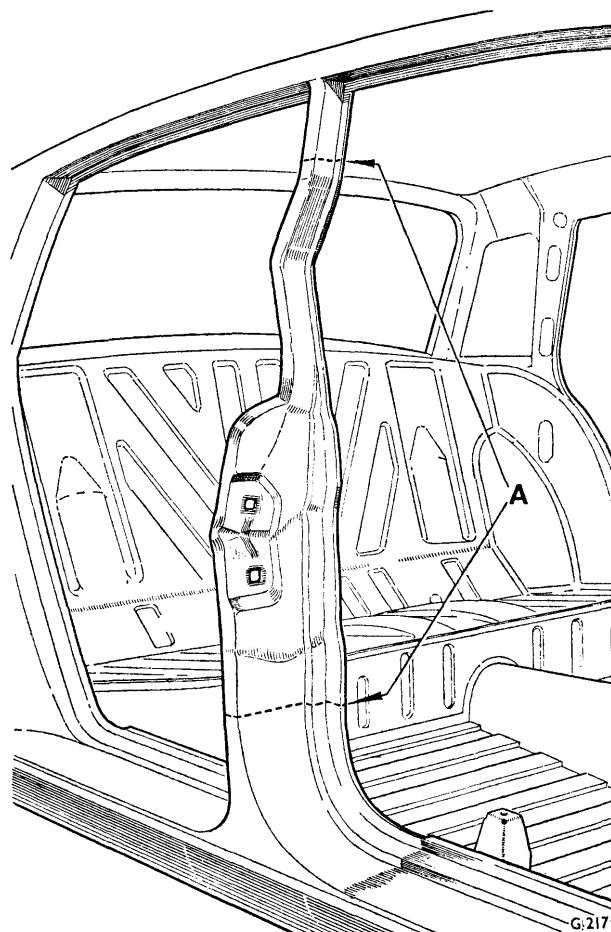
CUTTING A DAMAGED SECTION FROM A BODY CENTRE PILLAR (4-Door Saloon or Long Wheelbase Cars)
